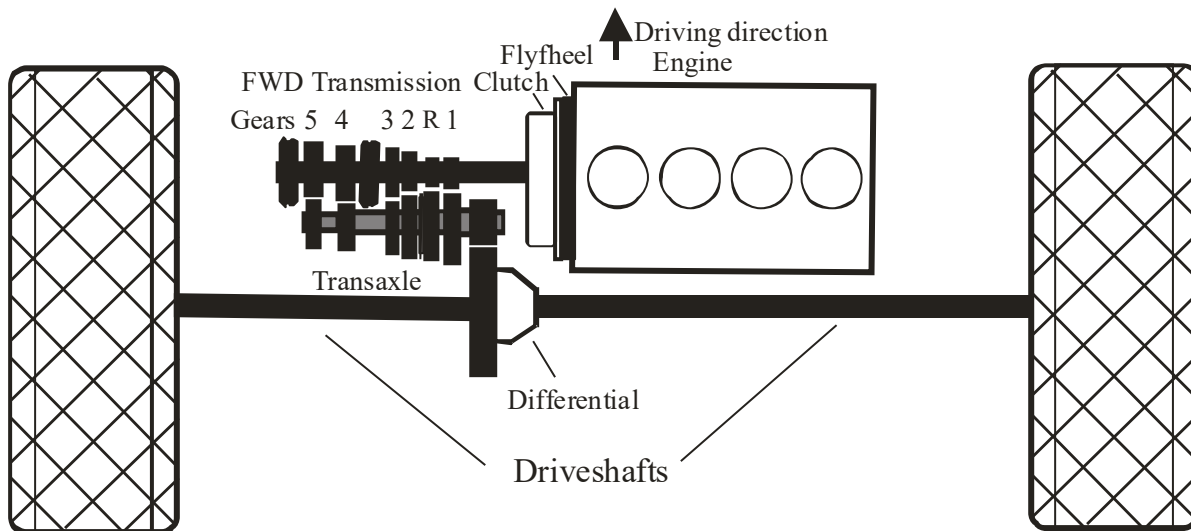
Front-wheel drive manual transmission. Five-speed and reverse gearbox.
